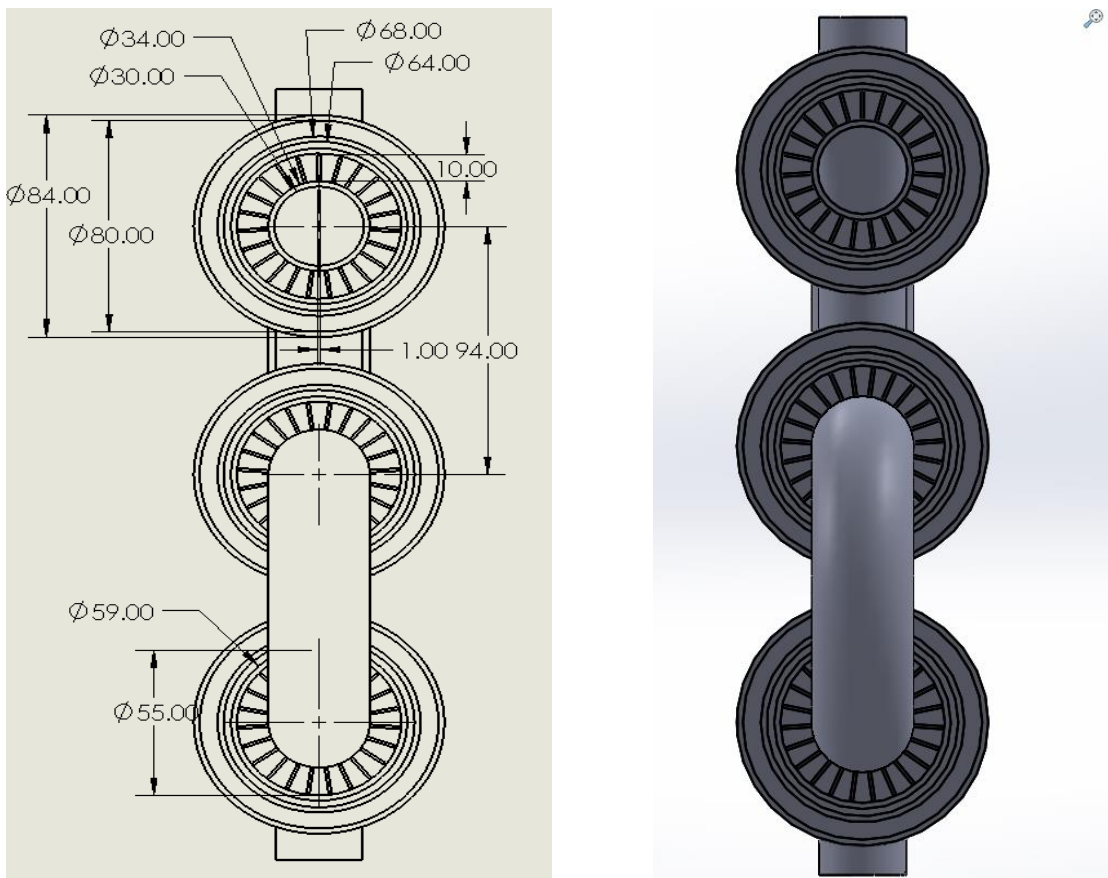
Side view of the concentric tube PCM heat storage setup
